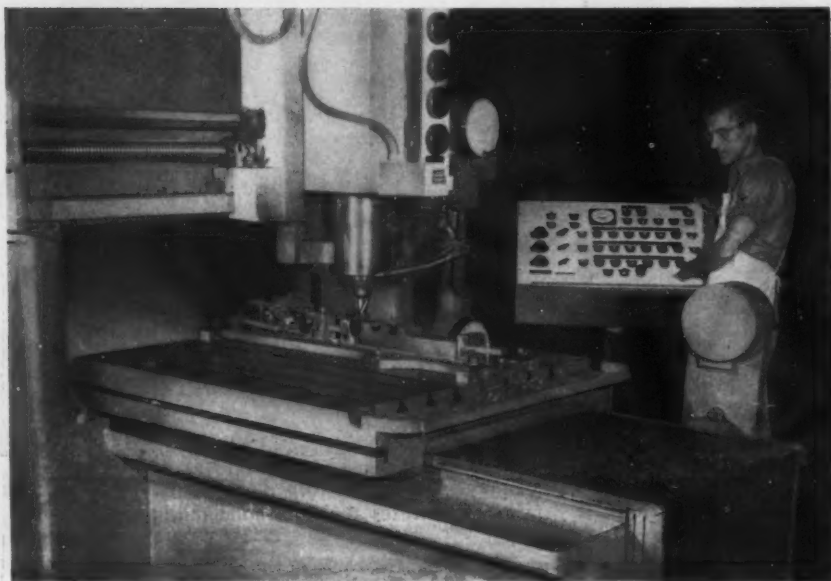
Remington-Rand punched cards completely control the operation of this three-dimensional profile-milling machine.
